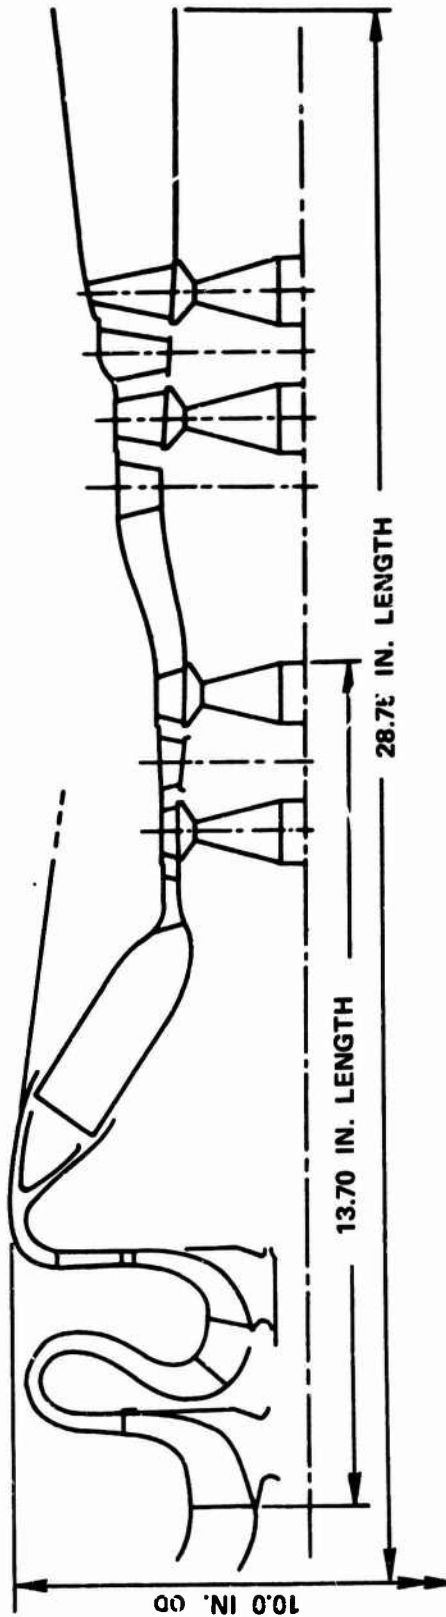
Turboshaft Engine Schematic With Two-Stage Centrifugal Compressor, Straight-Through Annular Combustor, and Two-Stage Axial Turbine.
